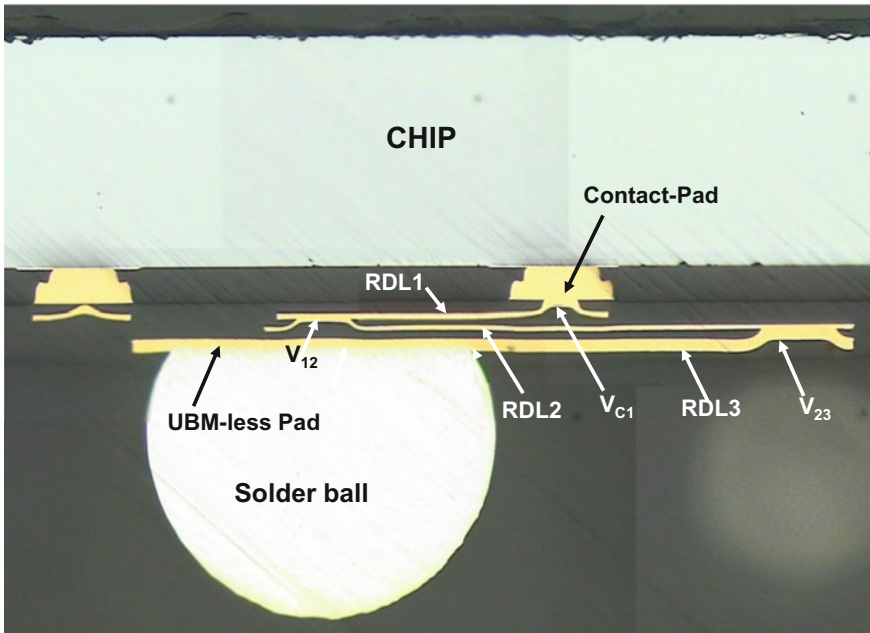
Cross-section image of the assembled fan-out wafer-level package with three RDLs
